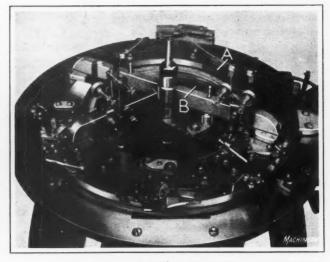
View of Knitting Machine, indicating Slots in Needle Plate and Cylinder
